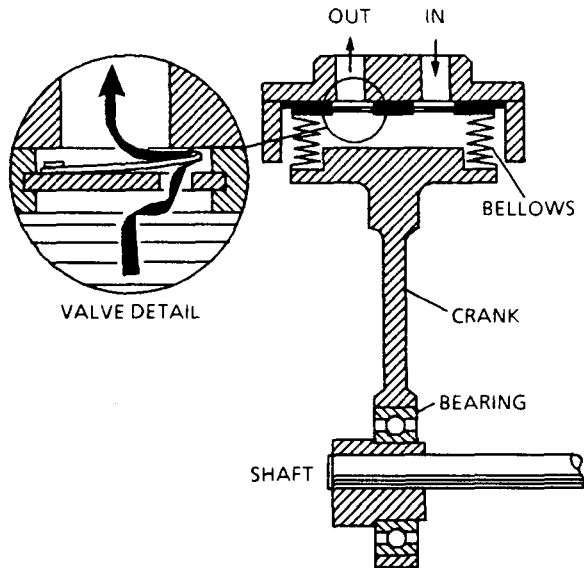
Metal bellows vacuum pump (courtesy of Metal Bellows Corp., USA).
